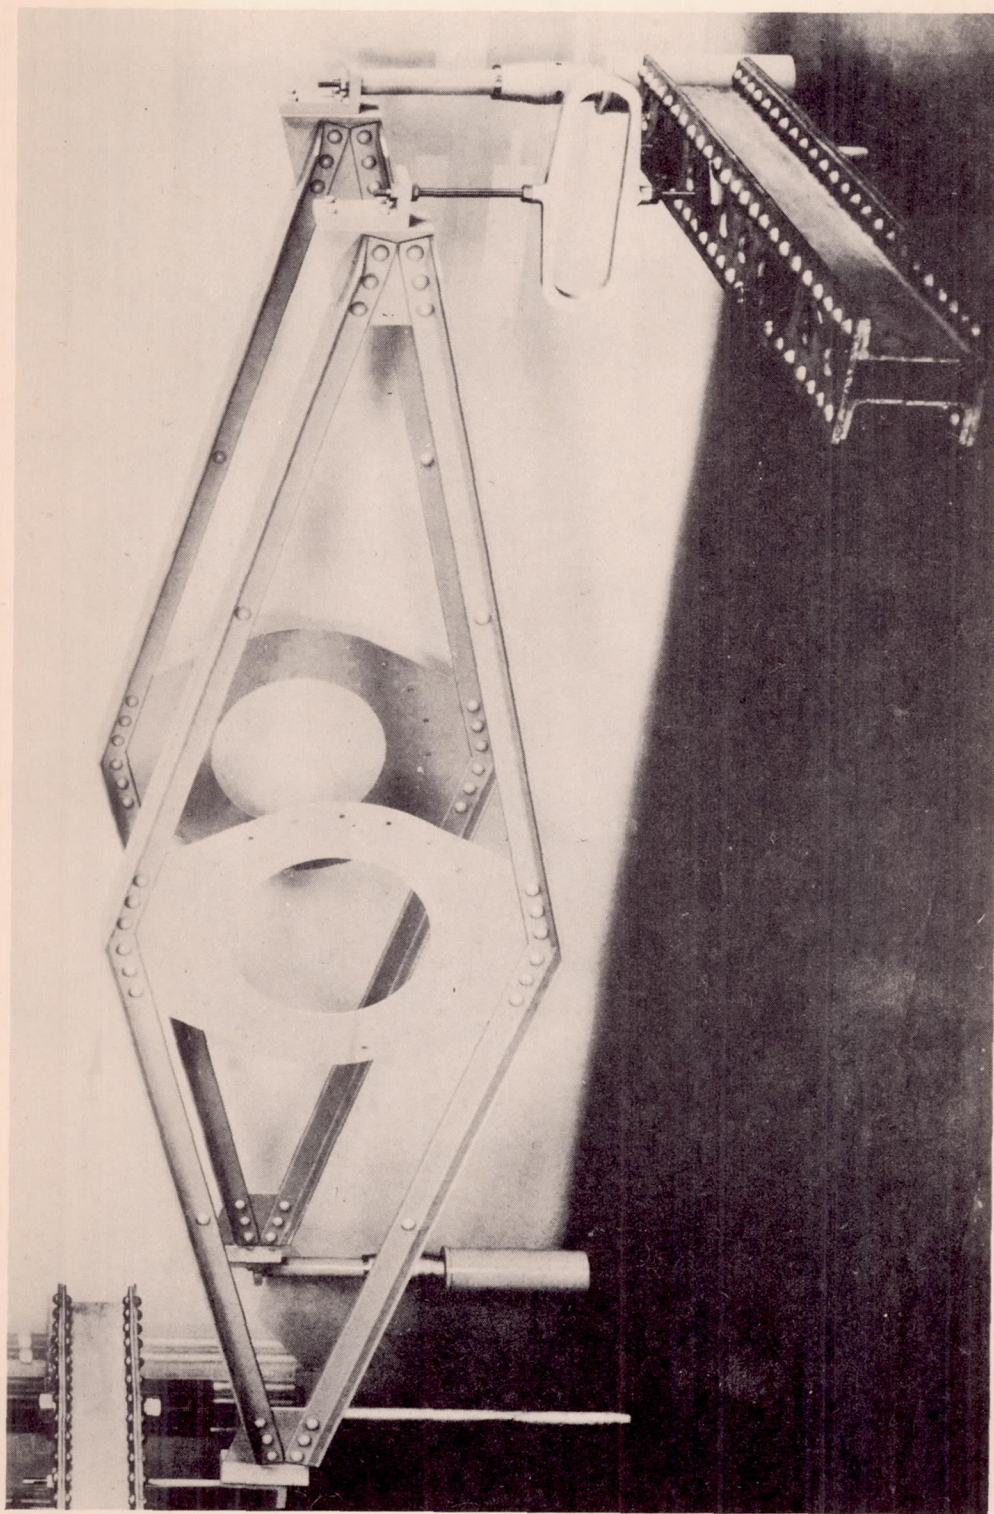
60,000 ft/lb capacity torsion loading fixture.
